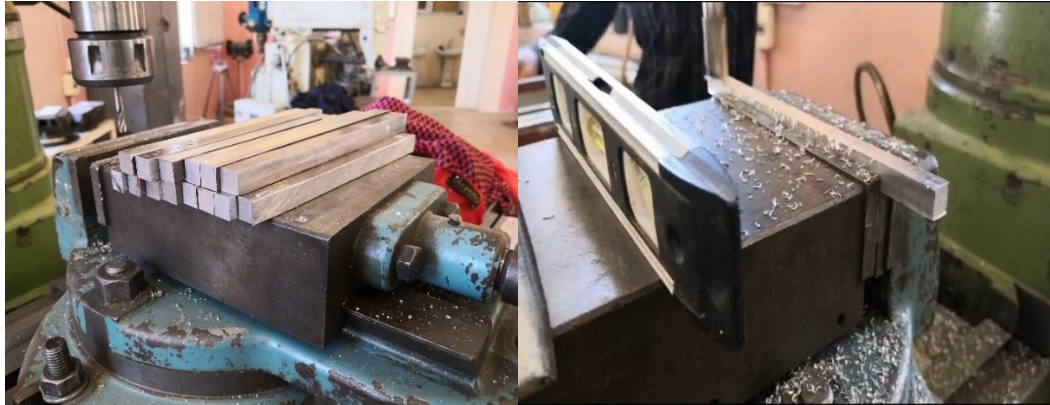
Experimental work on the Al alloy 2024 to make Charpy V-notch Specimens machined by milling machine operation.
